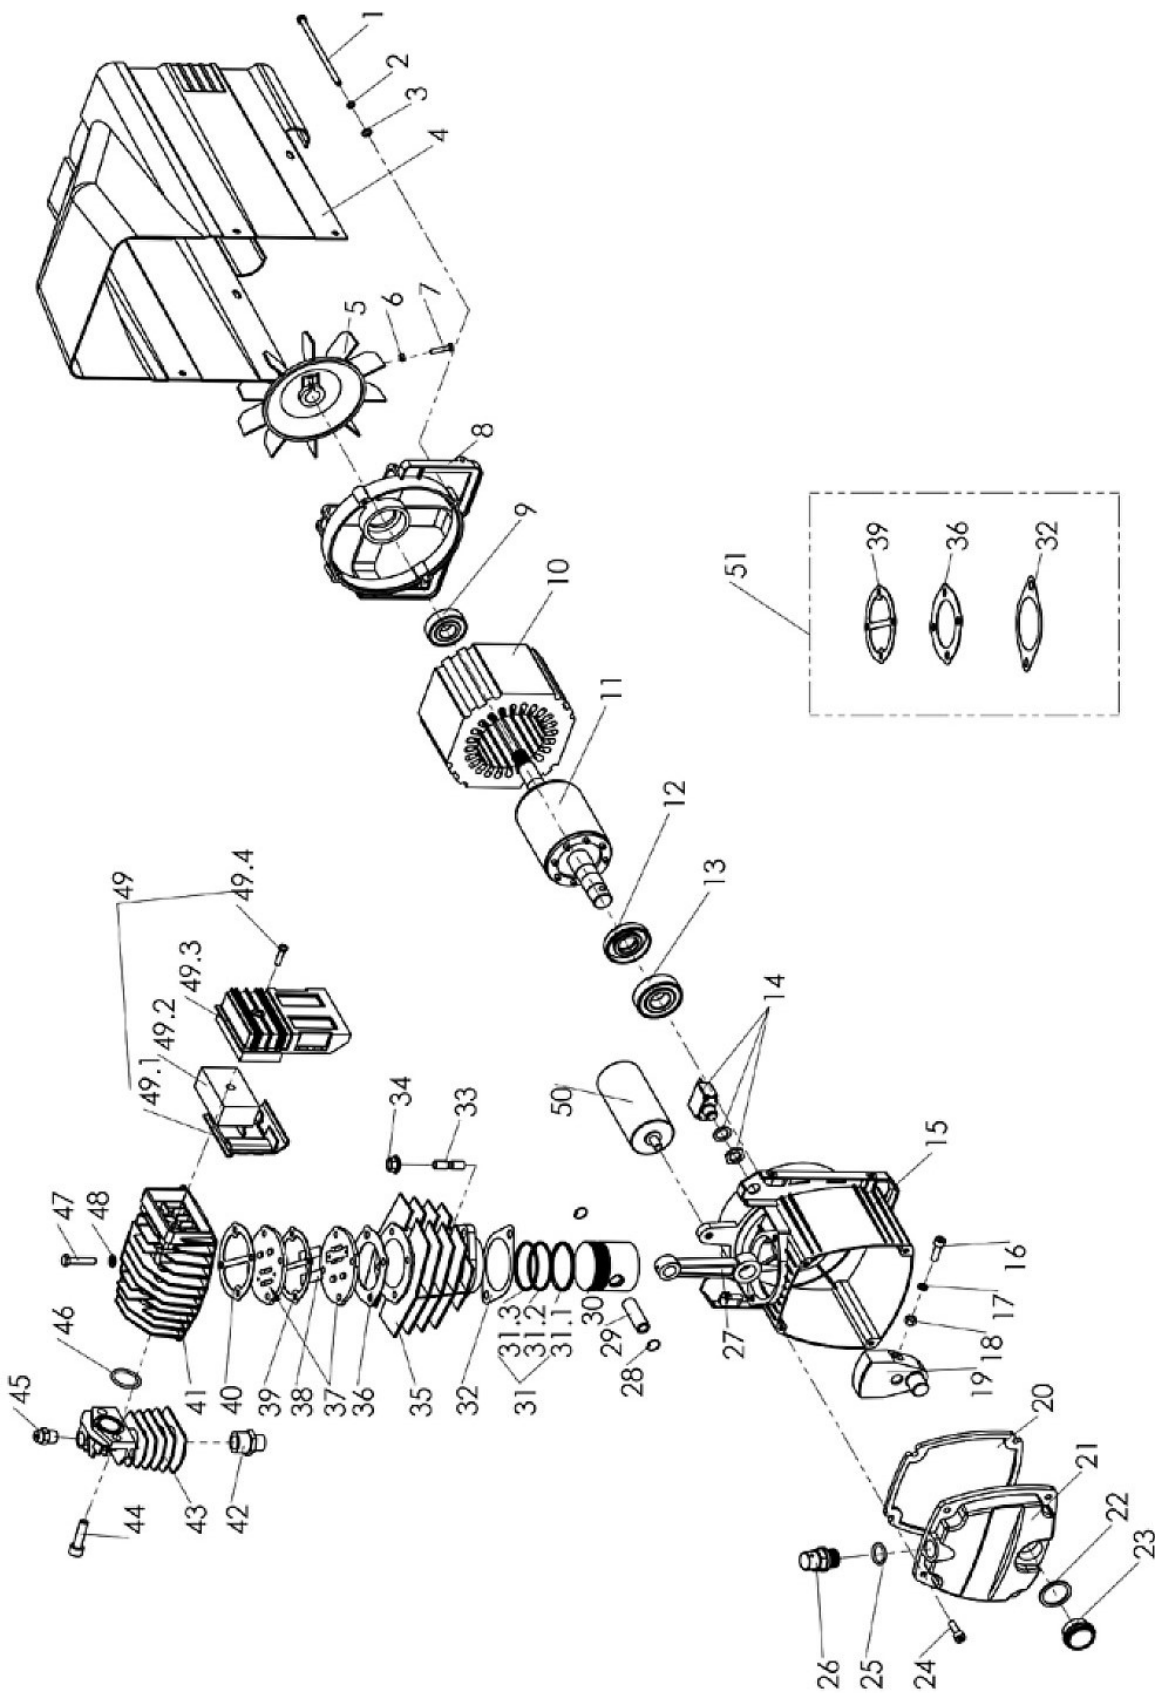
Spare parts drawing 2 - Compressor MOBILBOY 301/50 AC
